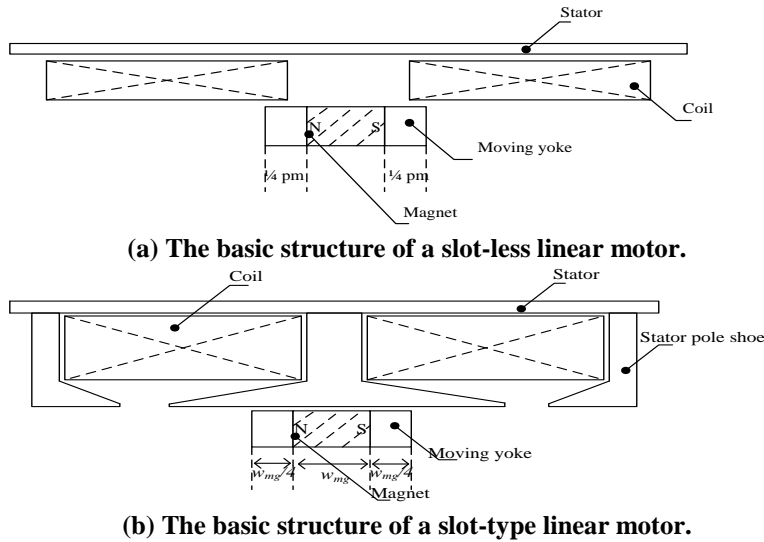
Slot-less and slot-type linear motor for tart moulding device.
